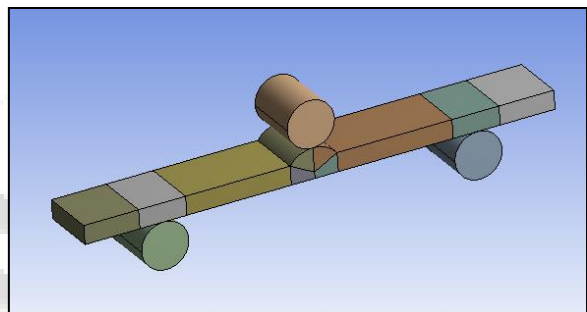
Aluminium Solid Model-With Butt Weld
